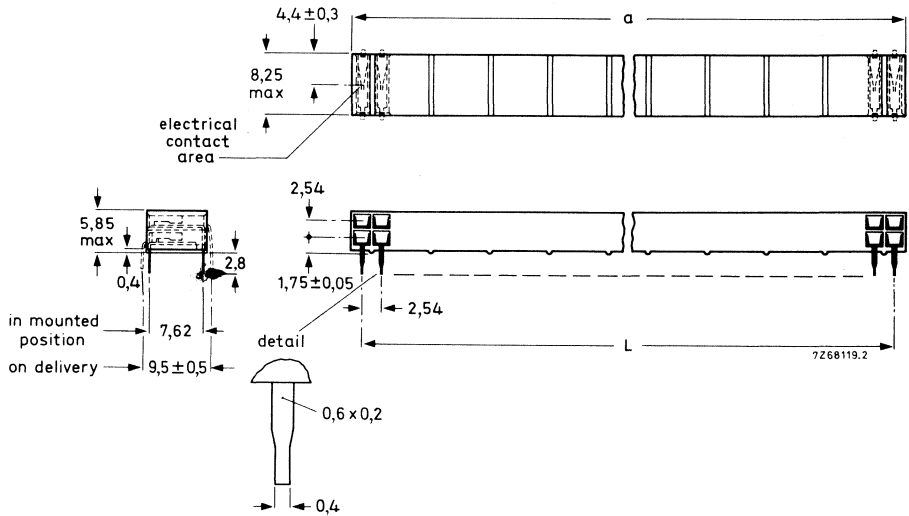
Board edge socket, double row. See table for dimensions a and L.
